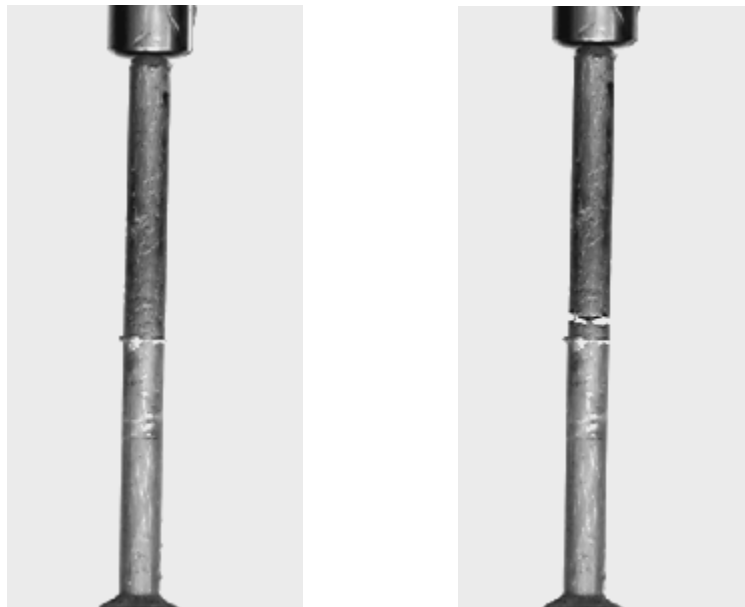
Soldered joint before and after tensile test (AlSi12 foam with the surface skin, Sn90Zn solder)
